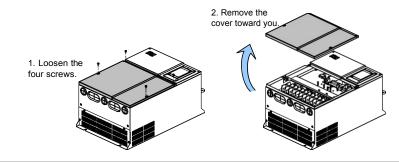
Removal of the front cover of the SET750 (sheet metal housing)
